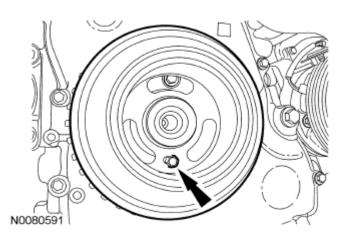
Locating Crankshaft Pulley Hole Bolt (6 mm x 18 mm) Courtesy of FORD MOTOR CO.
